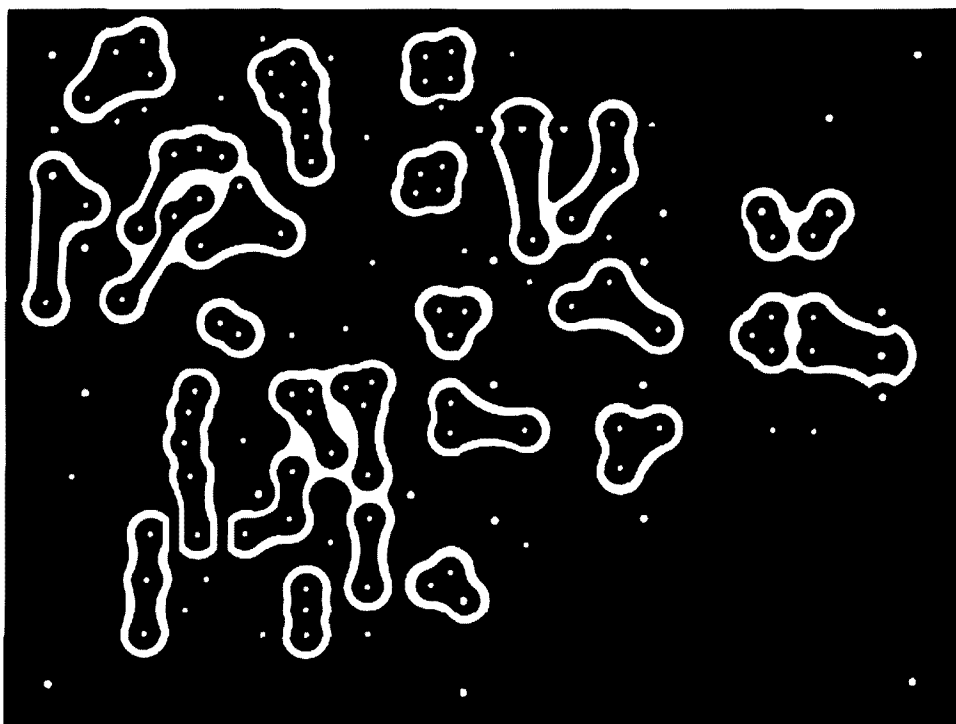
Full-sized printed-circuit board for the uhf converter. Component layout is shown in fig. 2.
